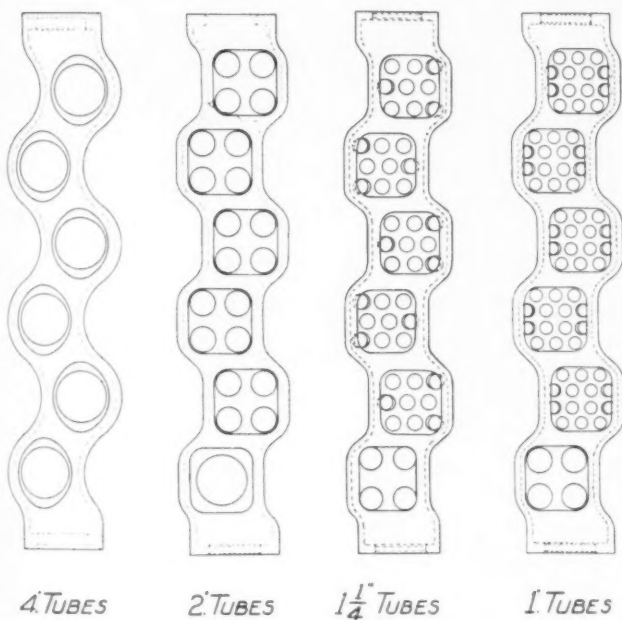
TUBE GROUPINGS USED IN HEADER-TYPE-BOILERS
